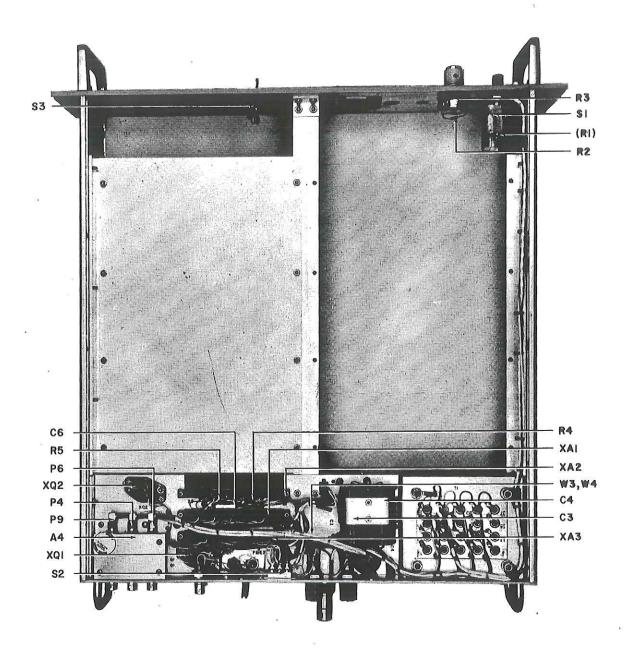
Type MTF-102A Microwave Tuning Frame, Bottom View, Location of Components.
